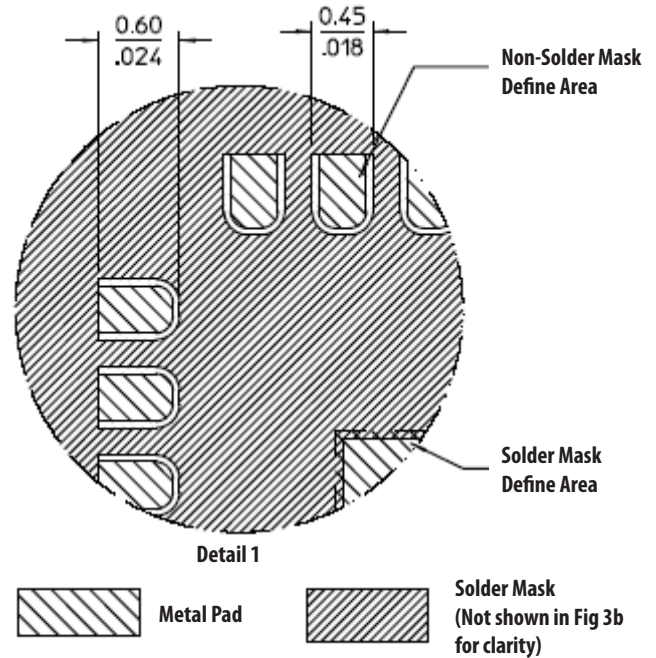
Recommended Customer's PCB PADOUT and spacing
